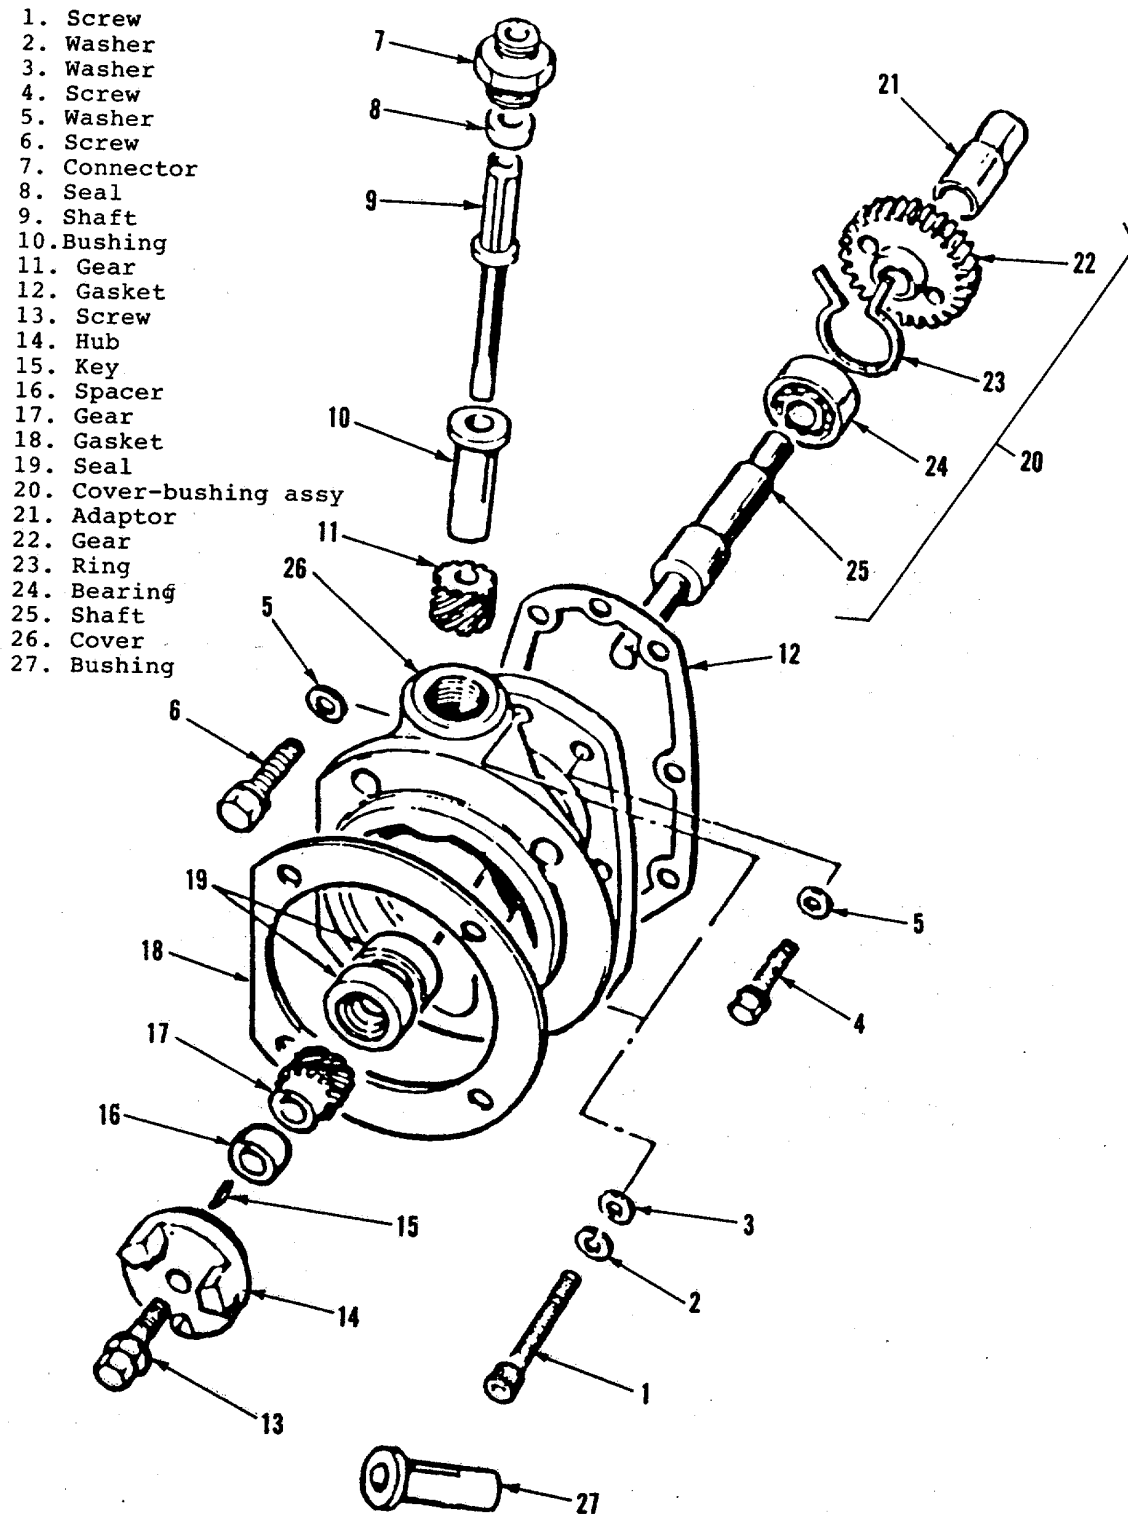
Mainshaft Cover and Tachometer Drive,
